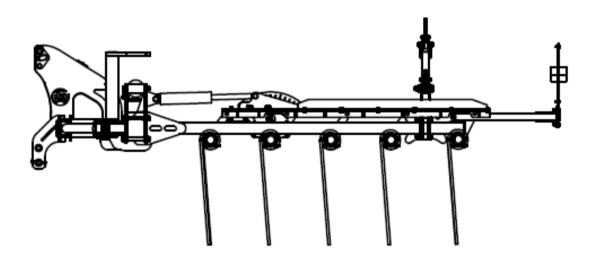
Side view of the MBS breaker, with the claw working section visible.
